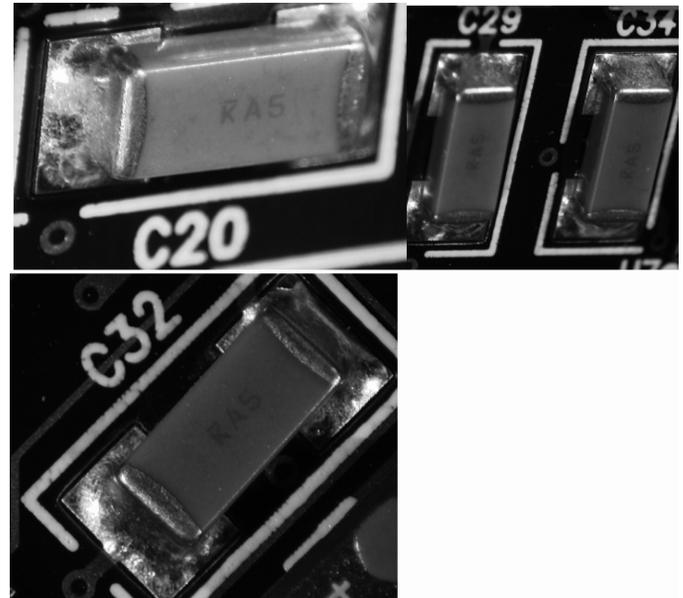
Photographs of the capacitor solder joints after just 15 thermal cycles.
